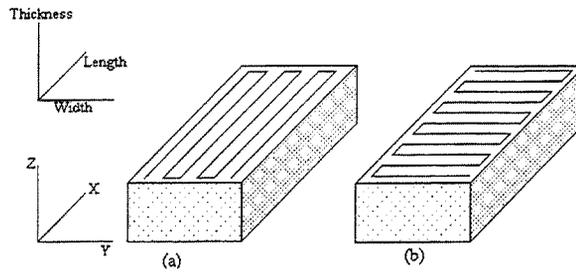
Fill patterns used a) 0° fill and b) 90° fill
